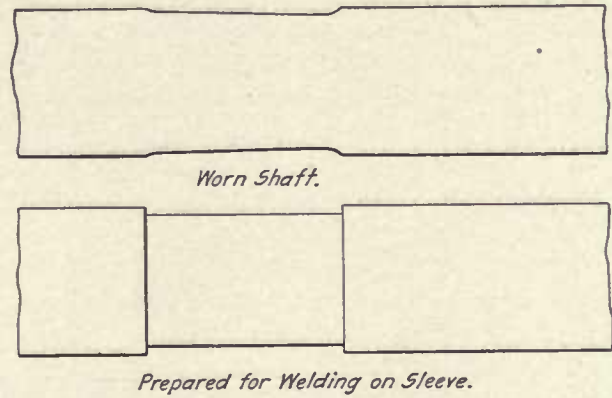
Worn Shaft Which Was Repaired by Oxy-Acetylene Welding.
